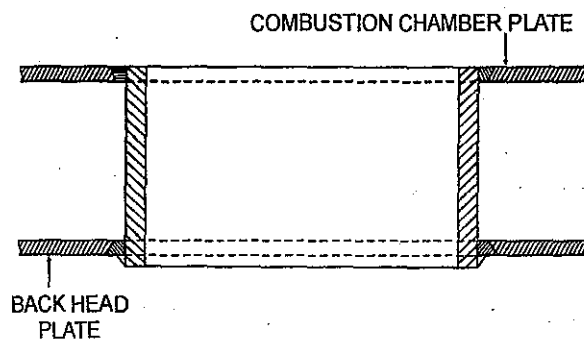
WELDING OF FLUE PIPES
